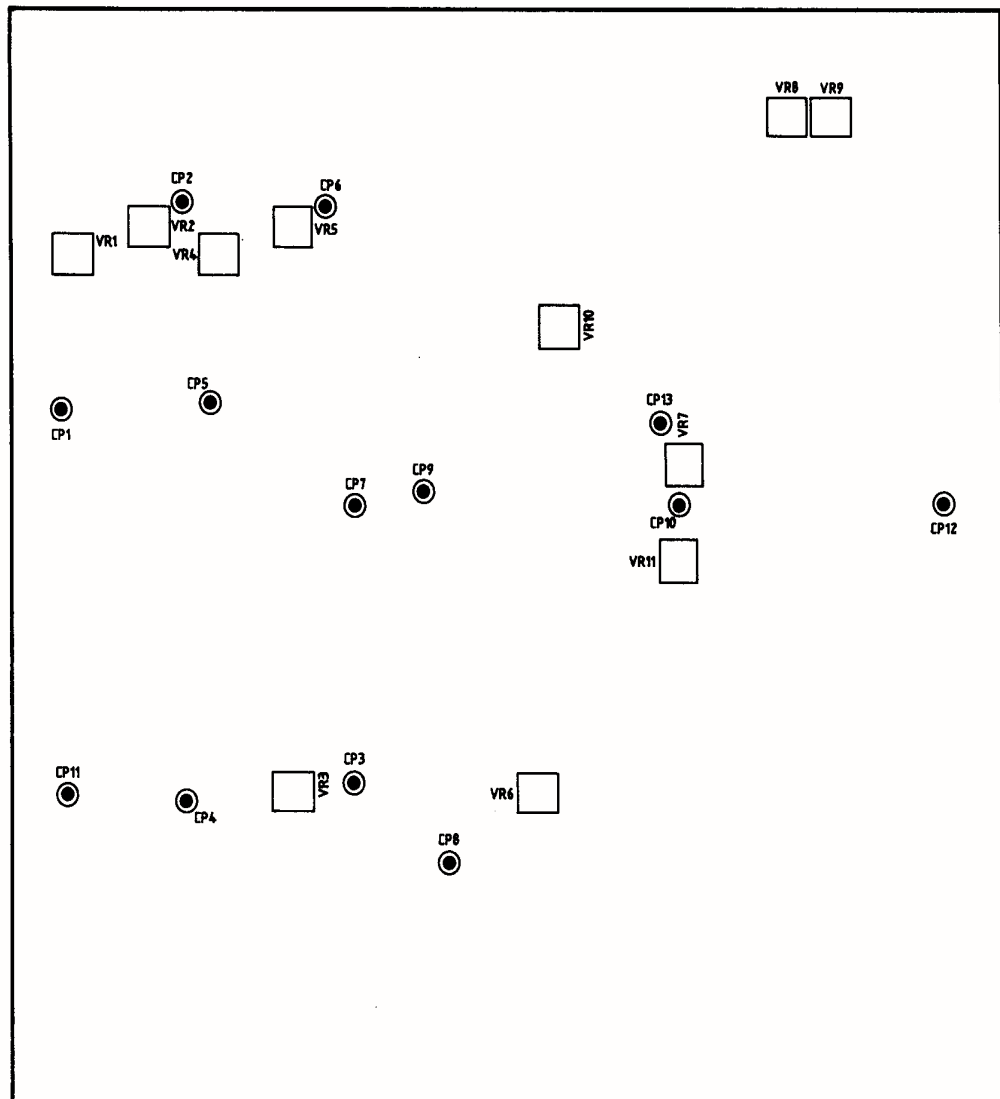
Location of Trimmers and Check Points on Reel Control PCB
